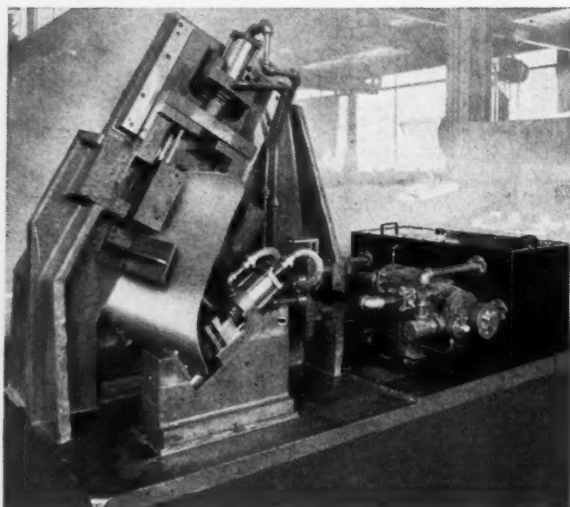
Four hinge holes are pierced and the handle hole is punched, flanged and coined to accurate dimension in this machine.
